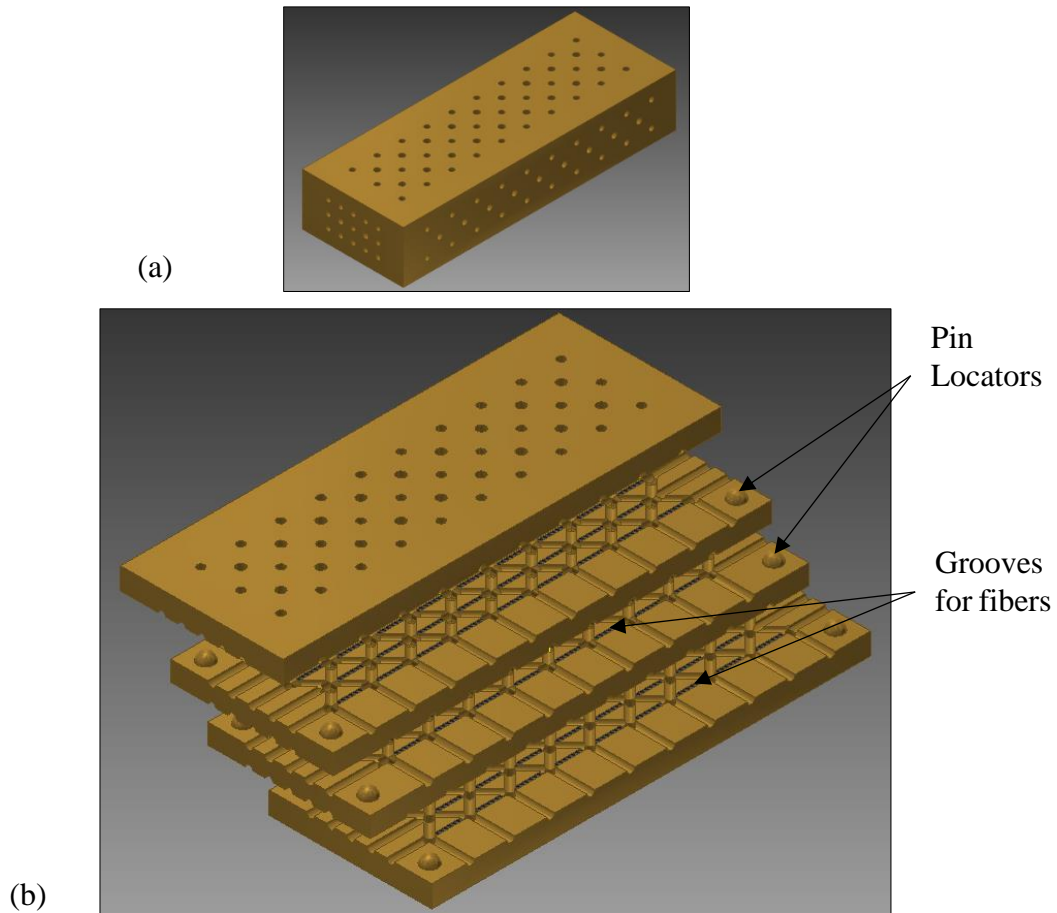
(a) Mold design (b) Split mold design – assembly
